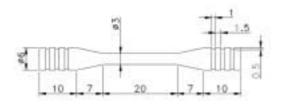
Dimensions of specimen used for tensile test (unit: mm).
